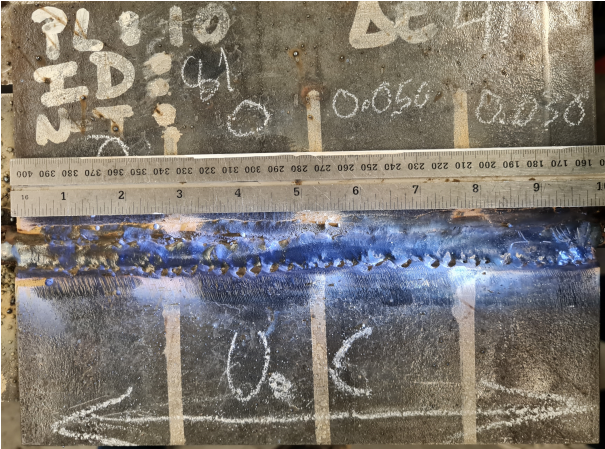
Example of a bad weld with undercut taken from the eighth plate.
